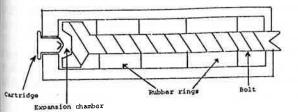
Cut away diagram of bolt end of a stunner, showing the expansion than bolt and rubber compression rings.
